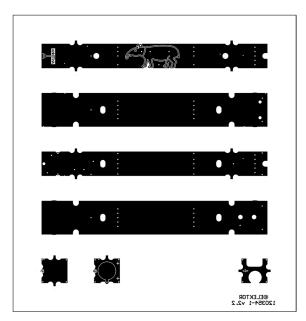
Copper on bottom of PCB Panel 120354-1 v2.2.
